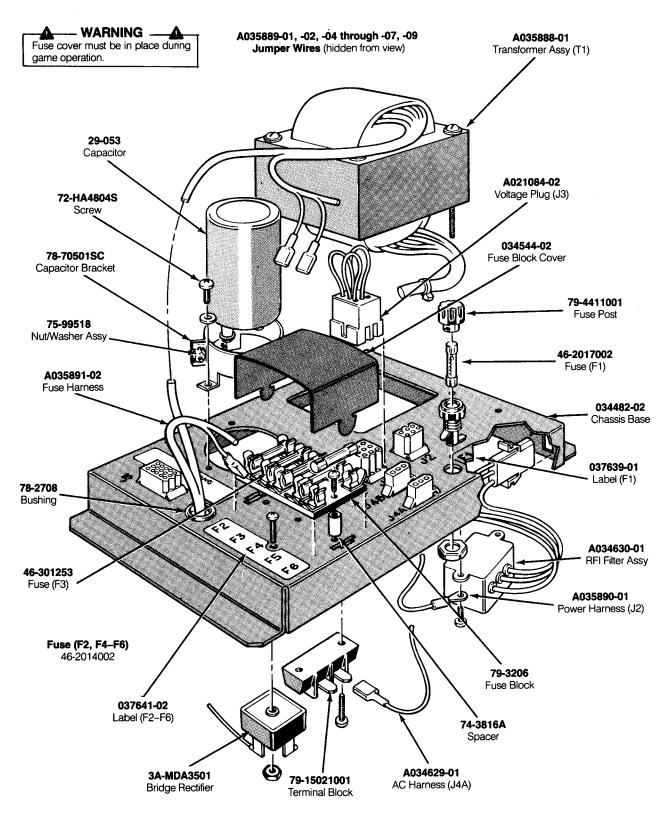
Linear Power Supply Assembly A037671-18 N
